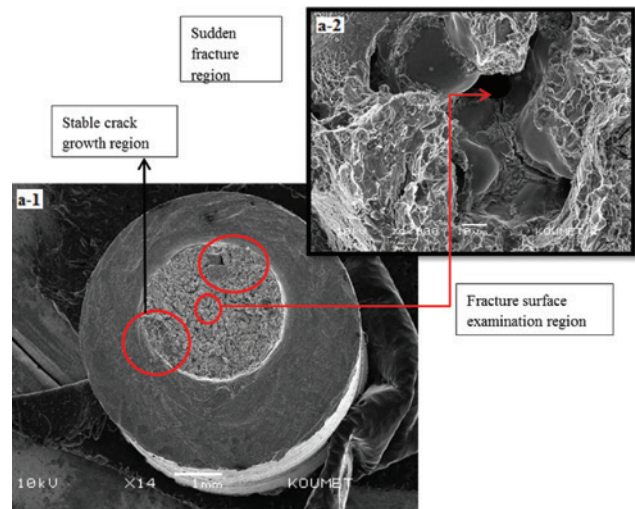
The SEM image of fracture surface morphology of thixoformed AA7075 after high cycle fatigue test
